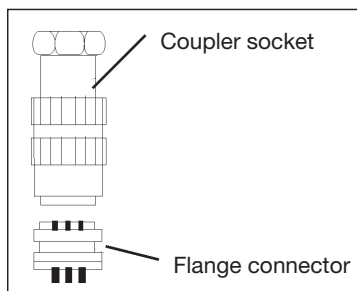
Coupler socket and flange connector for Type RVG-ST
